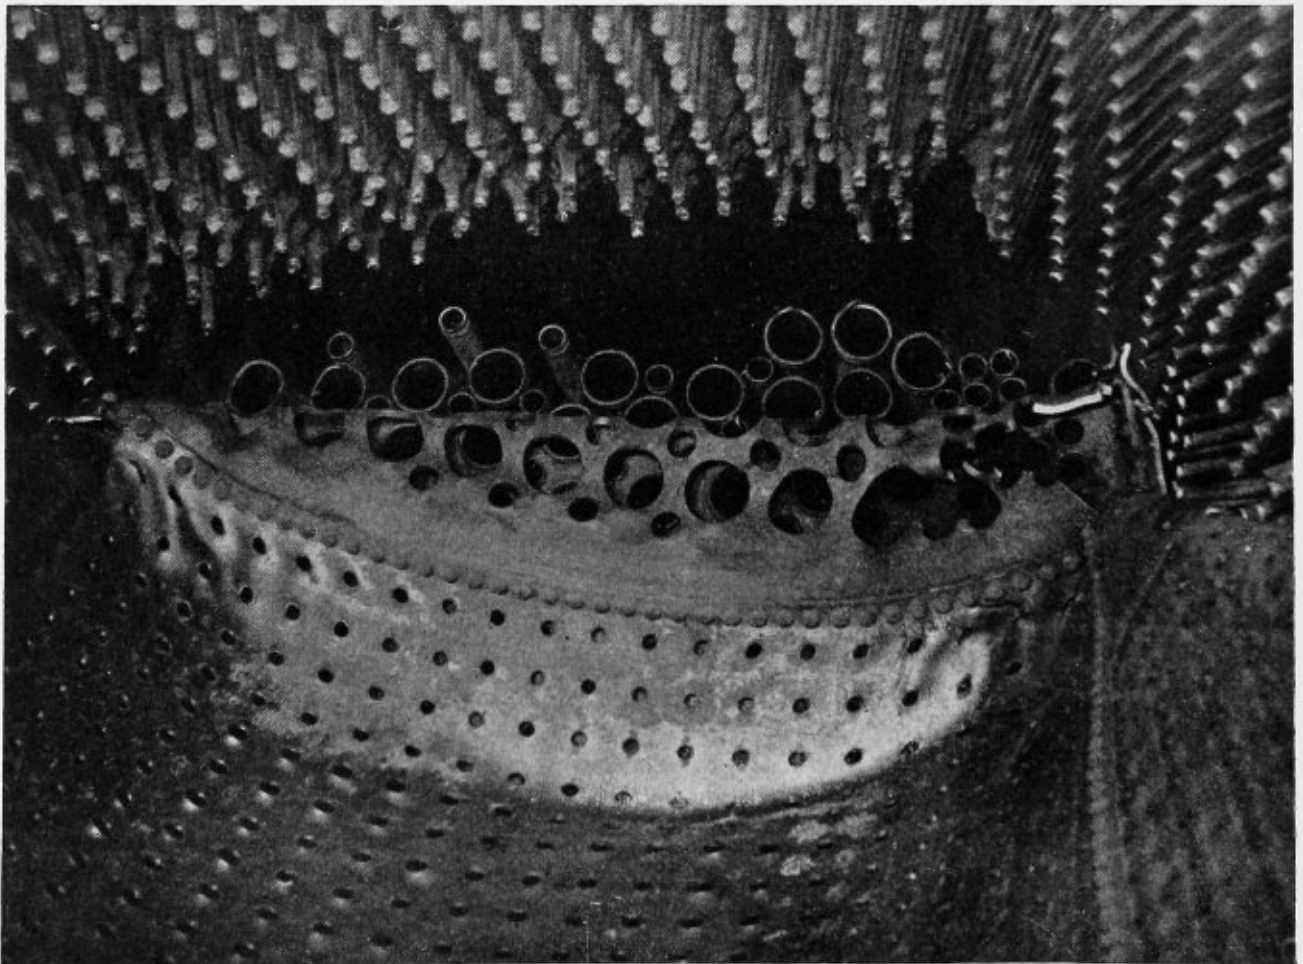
Combustion Chamber Firebox With Three-Piece Crown, and Side Sheets Which Failed With Serious Results
